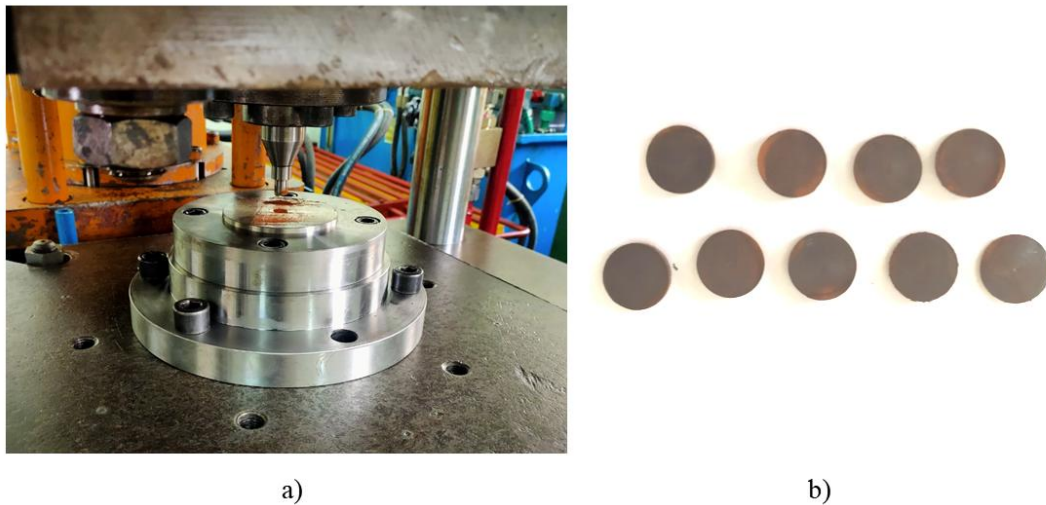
Experimental setup showing the die assembly mounted on the YH28-100 ton hydraulic press (a) and $\text{SrFe}_{12}\text{O}_{19}$ pellet samples after cold-pressing in the cylindrical mold (b).
